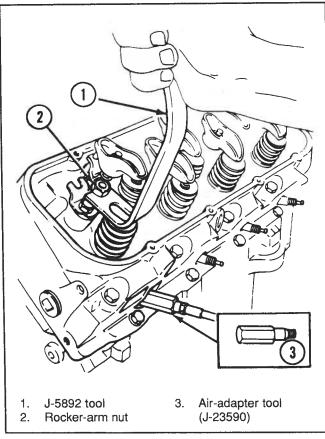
Compressing Valve Spring With Cylinder Head Installed
